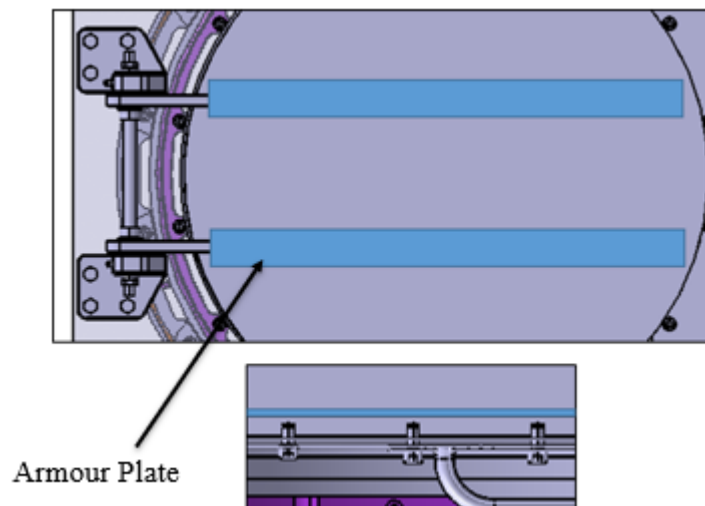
Addition of armoured plate on ribs of hatch assembly
